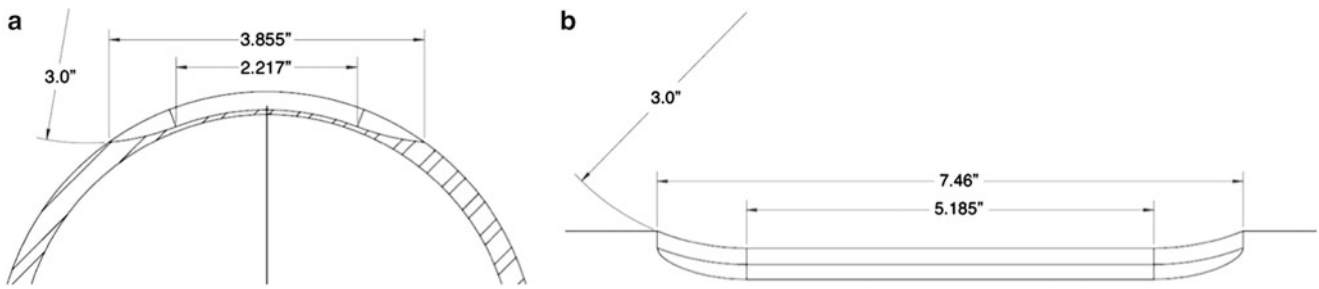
(a) Profile view of the machined defect dimensions, (b) axial profile of the machined defect dimensions
